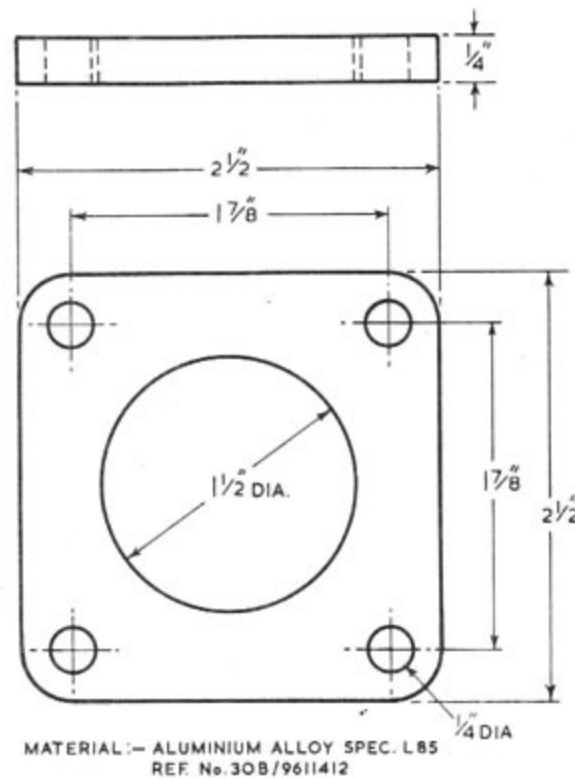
Spacer for overspeed trip governor gearbox (local manufacture)
